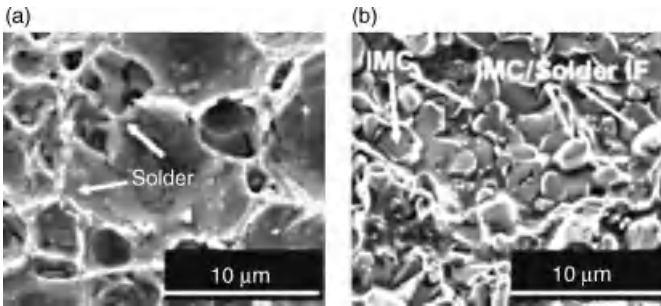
Fracture surface of as-reflowed solder joints with identical reflow conditions (reflow temperature = 260°C , dwell time = 90 s , cooling rate = 10°C/s) and tested in mode I at: (a) 1 s^{-1} and (b) 100 s^{-1} . The fracture surface of the sample tested at lower strain rate shows relatively many more dimples as compared to the sample tested at higher strain rate, suggesting a meandering crack path at lower strain rates.
